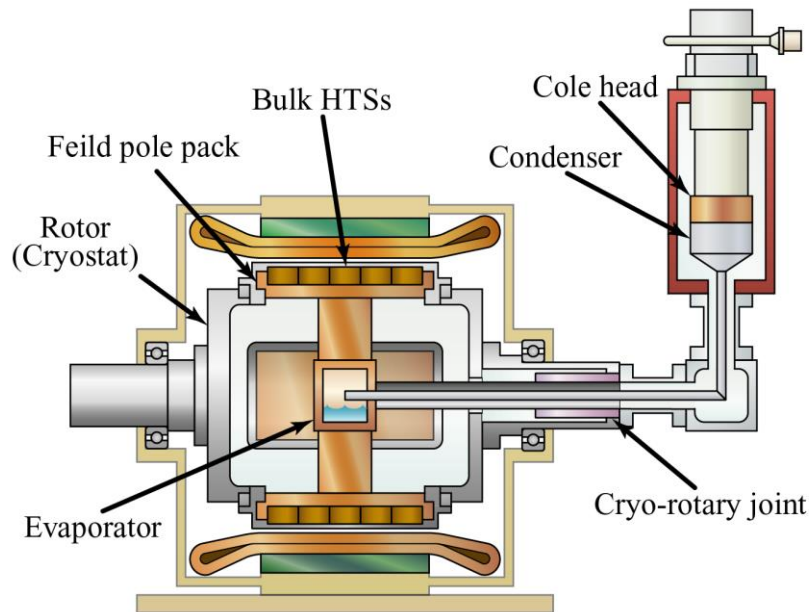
A sectional view of a thermosyphon-cooled HTS machines.
